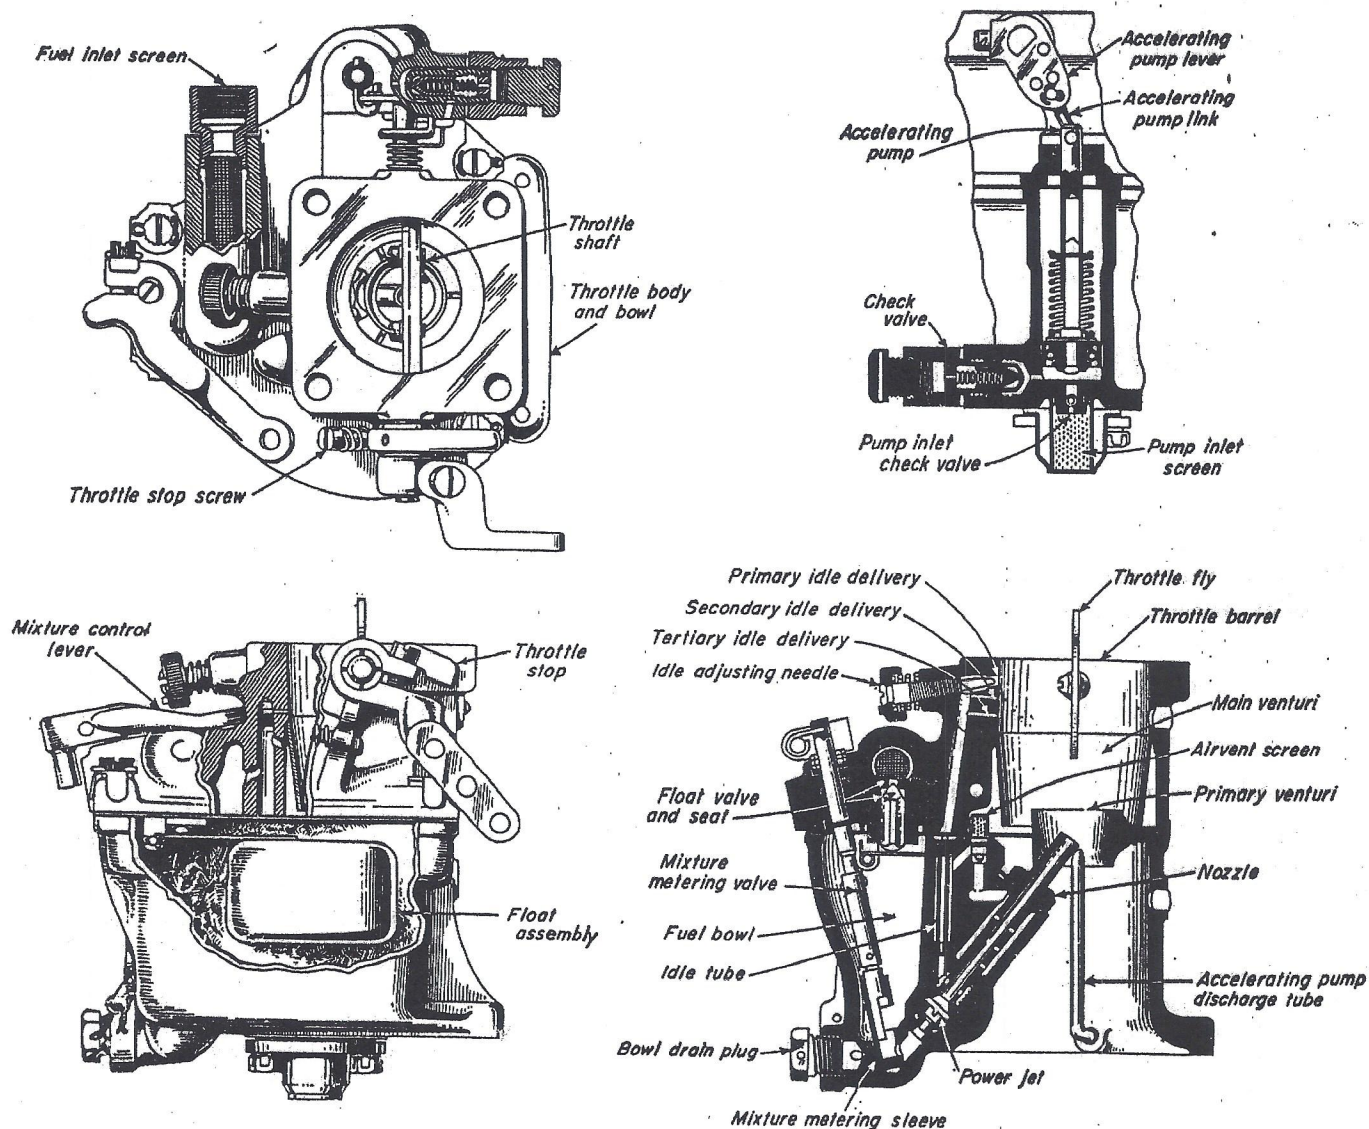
Cutaway illustrations of carburetor with relative positions of the components depicted.
